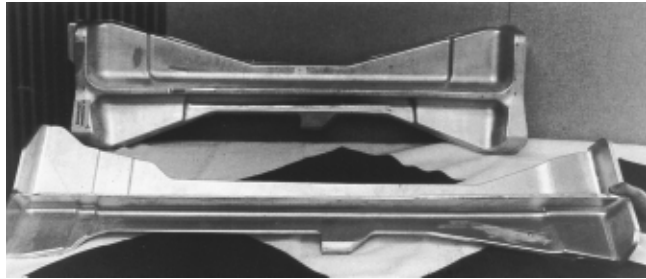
An example of a premium forged aircraft part of alloy 7175-T736 (T74)
